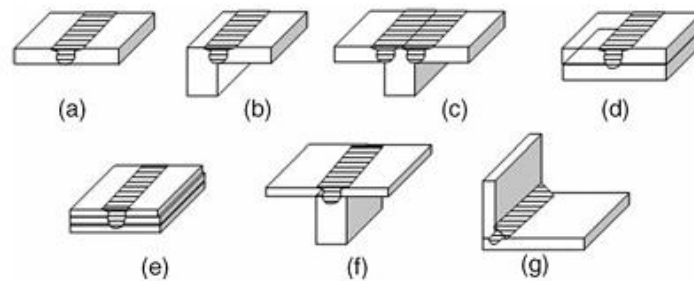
Joint configurations for friction stir welding: (a) square butt, (b) edge butt, (c) T butt joint, (d) lap joint, (e) multiple lap joint, (f) T lap joint, and (g) fillet joint [1].
